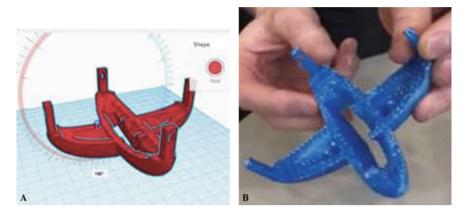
Prototyping and printing a drone accessory mount. a Accessory design for anemometer. b 3D printed accessory prototype for anemometer
